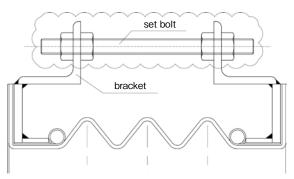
Half-sectional view of XP-221 equipped with a set bolt
